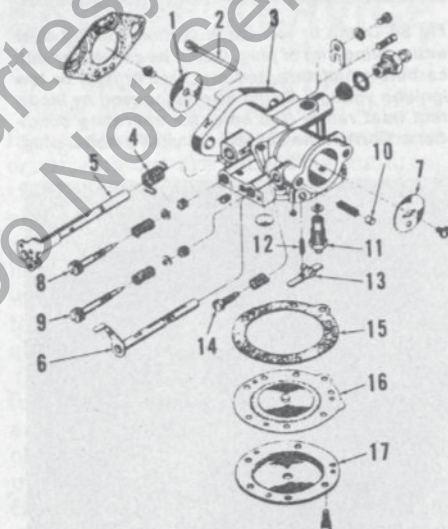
Exploded view of Tillotson Model HC carburetor. Model HJ is similar.
